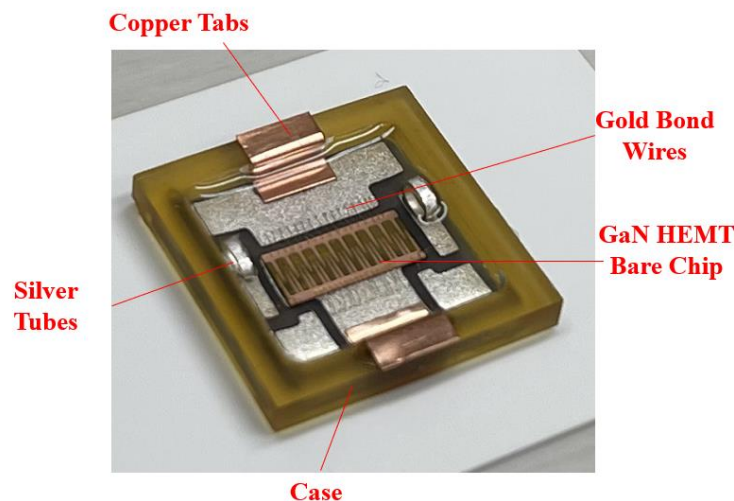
Fabricated wire-bonding GaN HEMT package.
